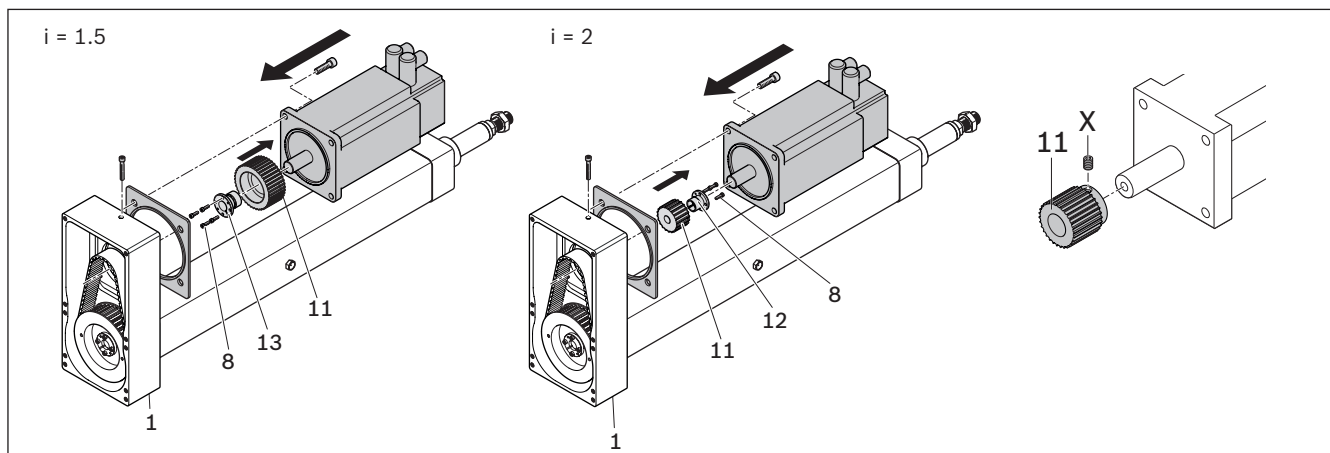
Mounting the motor and motor-side belt pulley, $i = 1.5$ and $i = 2$
